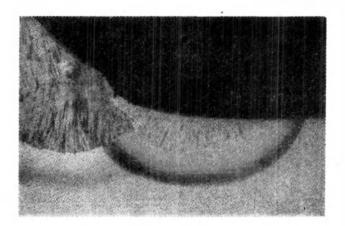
Macrosection of the TIG dressed toe profile of a cruciform fillet welded joint in HT80, tungsten electrode 3.2φ, Ar 10 1/min, current 250A, voltage 14V, travel speed 14 cm/min. The axis of the TIG torch is directed, at 0.5-1.5 mm from the MMA welded toe, towards the parent metal⁴×5.
